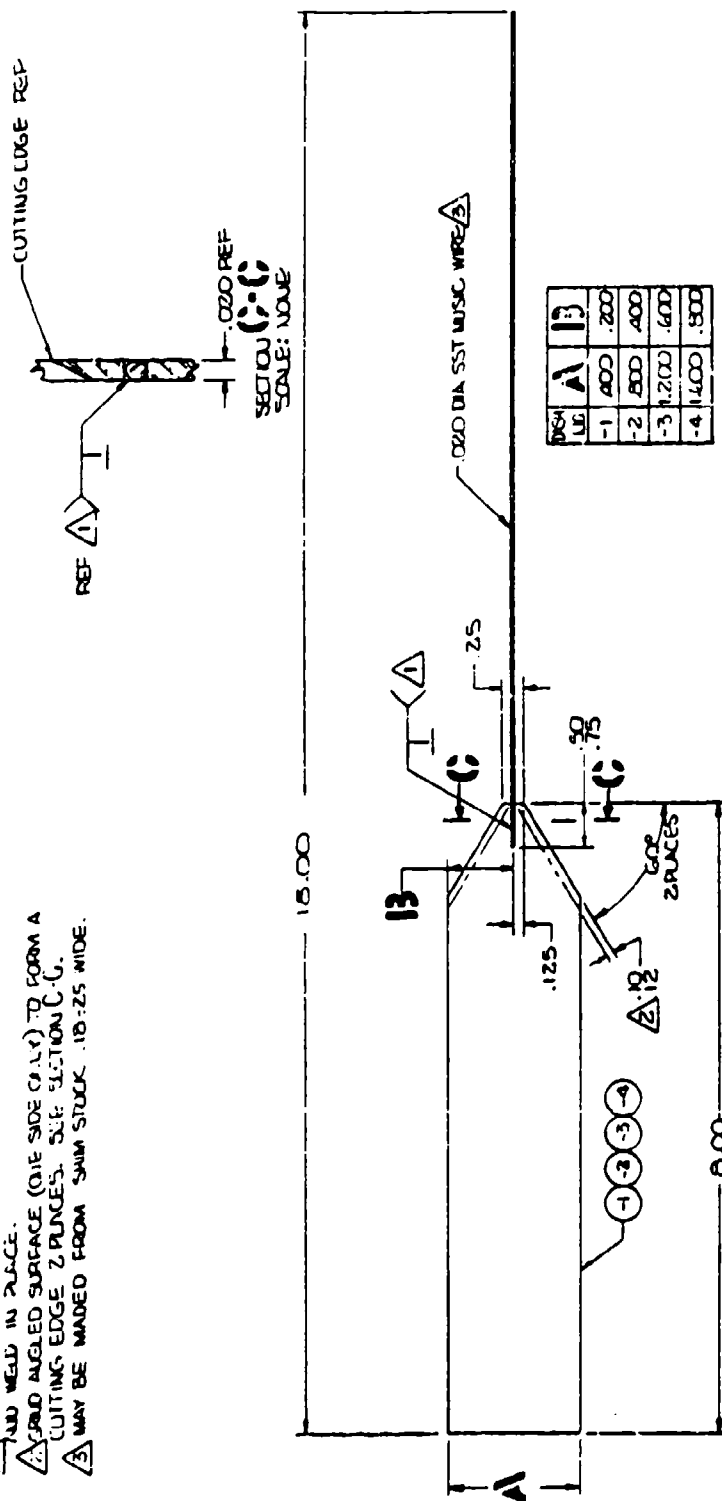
Bonding Support, Alignment and Cutting for Motor Specimens
